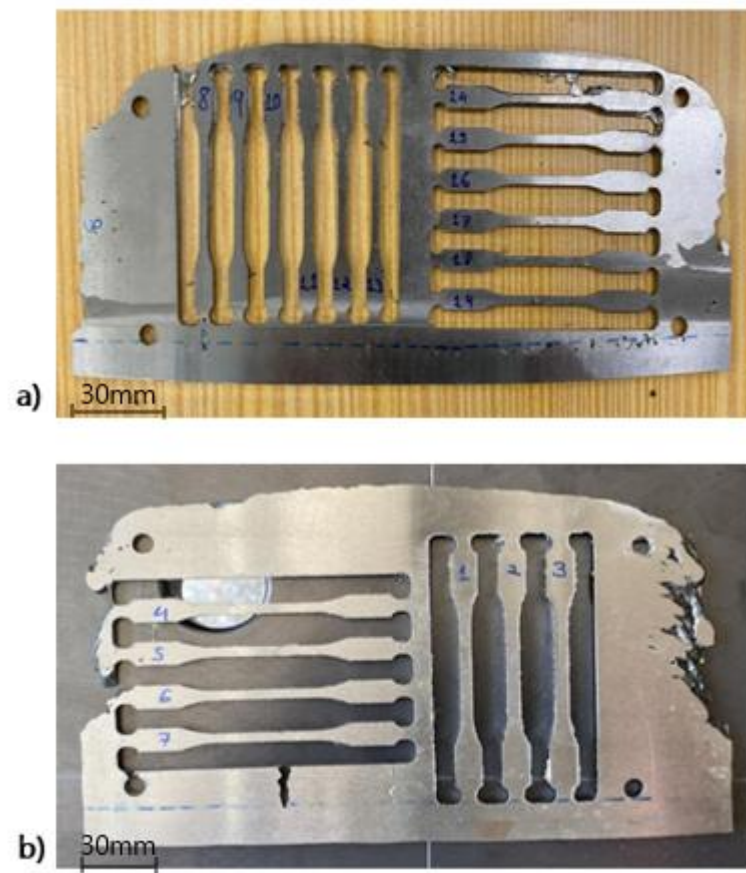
Location and direction of samples on the machined walls: a) Samples Wall 2; b) Samples Wall 1
